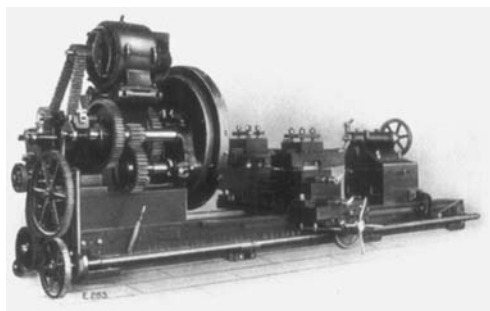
Motor connected directly to Lathe by Noiseless Drive Chain.
